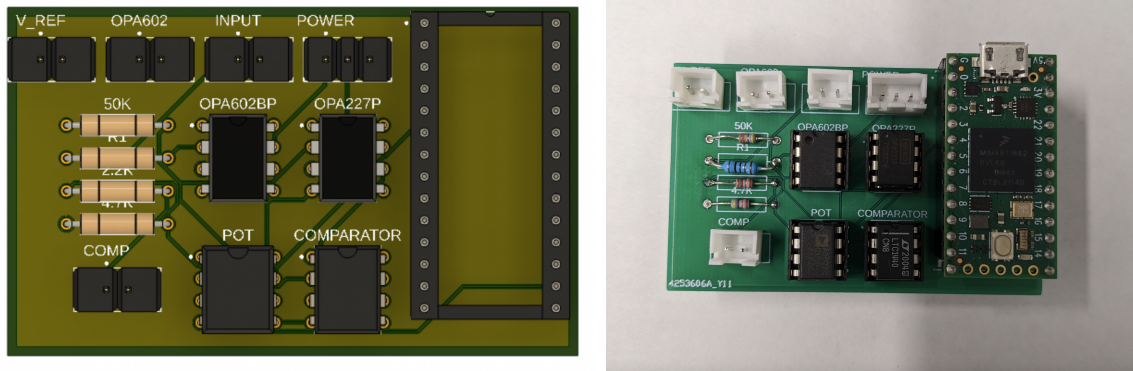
A-to-D stage CAD design (left) and printed circuit board (right)
